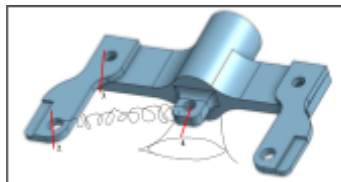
Assembly of the scraping blade holders and the part that is connected to the DC motor.
